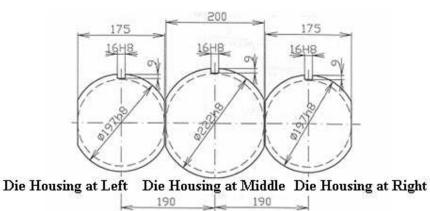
Top View of the Circular Die Housings of the Die Holder [46]
